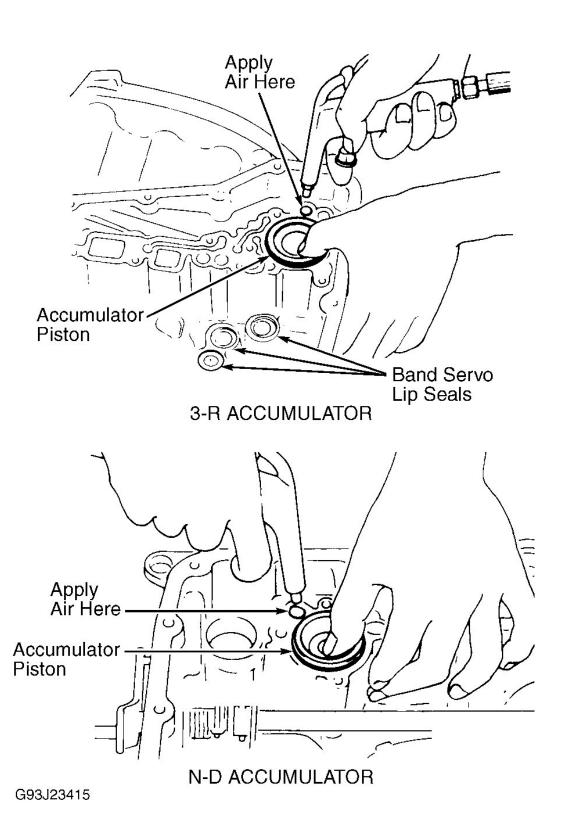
Removing N-D & 3-R Accumulator Pistons
